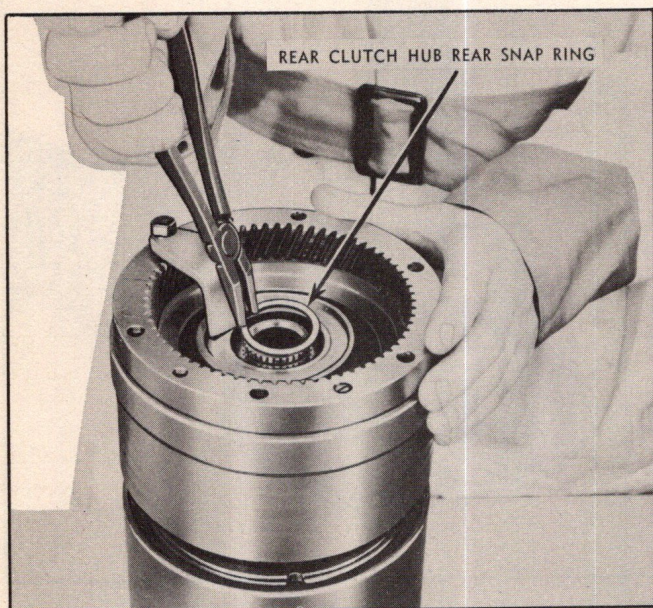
Installing Rear Clutch Hub Rear Snap Ring
